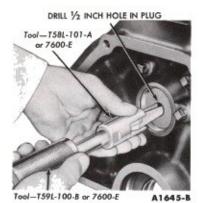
Camshaft Rear Bearing Bore Plug Removal
